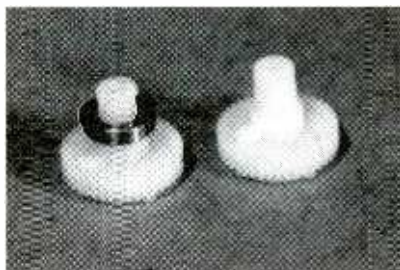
The bull gear on the left (with the bearing) has had its tab removed, while the bull gear on the right is unmodified.
